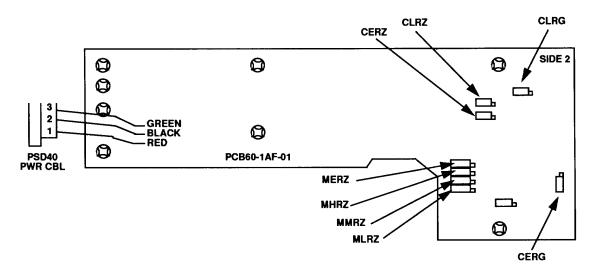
PCB60-1AF-01, side 2 - adjustment locations.
